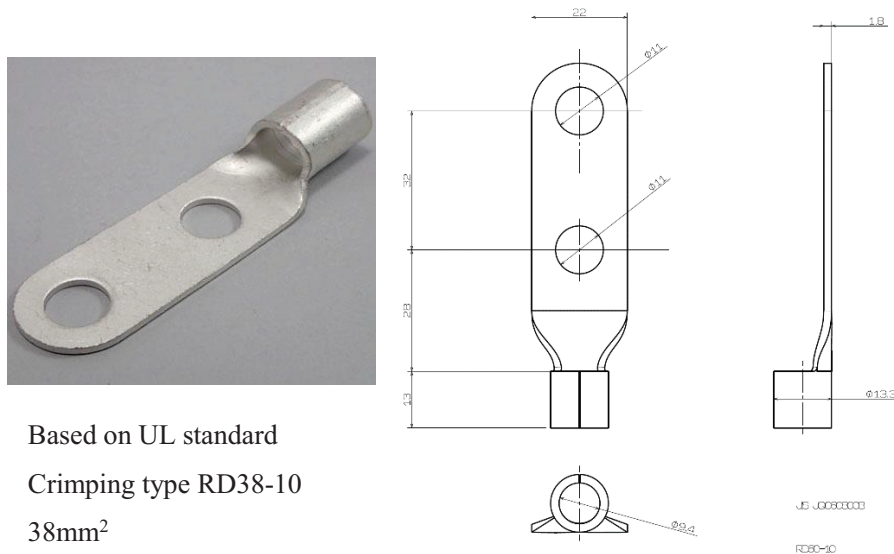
Crimping type solderless terminal RD38-10 for wire 38SQ.
